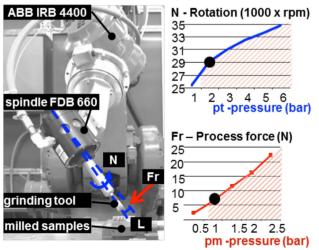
Integrated robot with the pneumatic spindle grinding a milled steel sample
